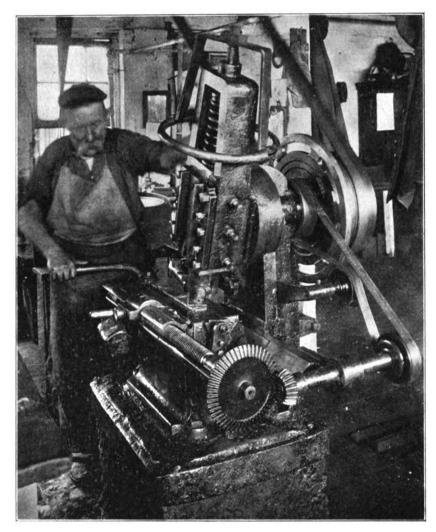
SHOWING POWER CUTTING MACHINE.
